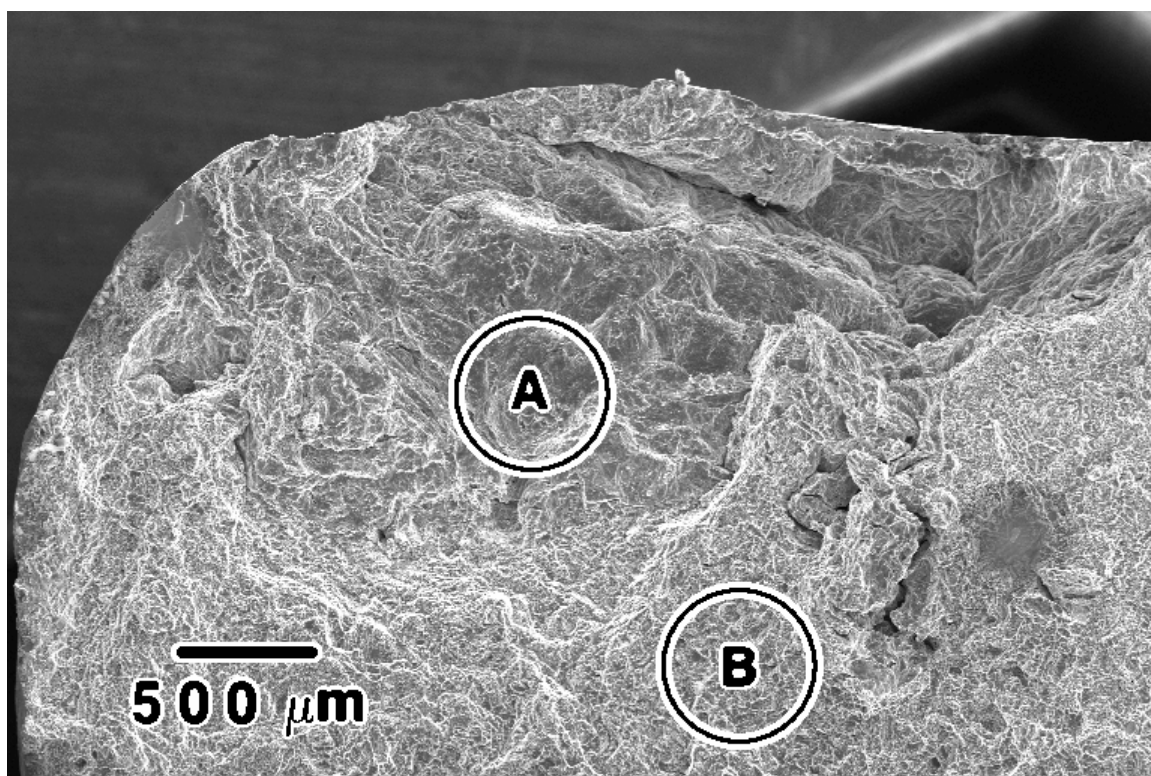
SEM of Fractured Wheel Rim Produced by the Squeeze Casting Method
